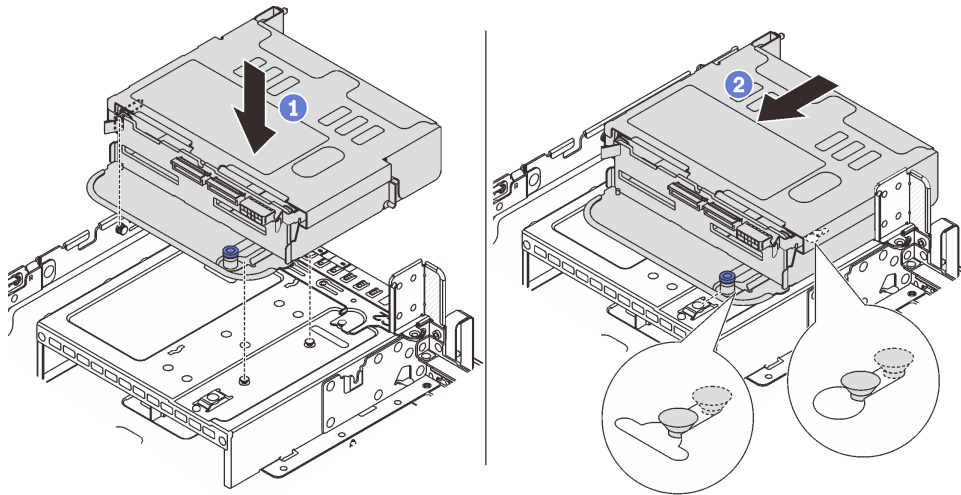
Installing the 4 x 2.5-inch rear drive cage
